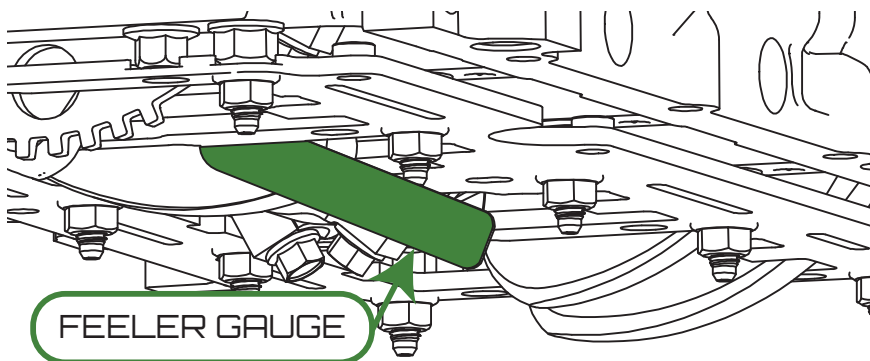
Inspecting Clearance with a Feeler Gauge
